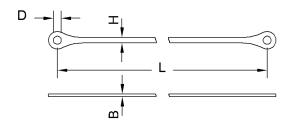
Dimensions of mid-point suspension backstay shackles on the main boom after the attached reducing piece
